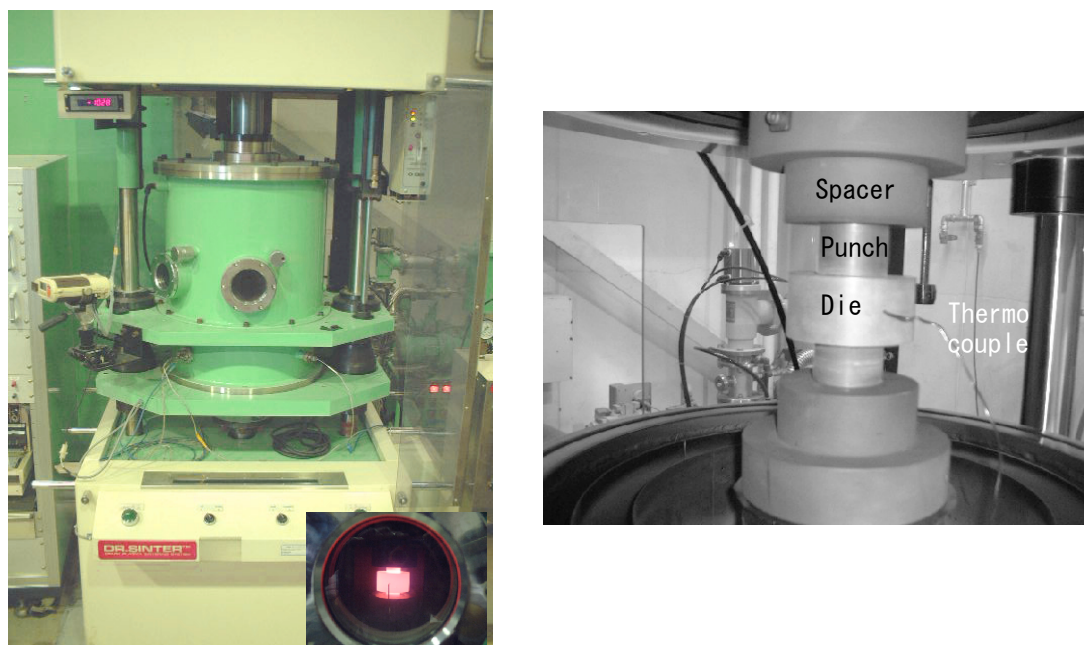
Spark plasma sintering machine DR. SINTER(R). The outside appearance (left) and inside chamber.
